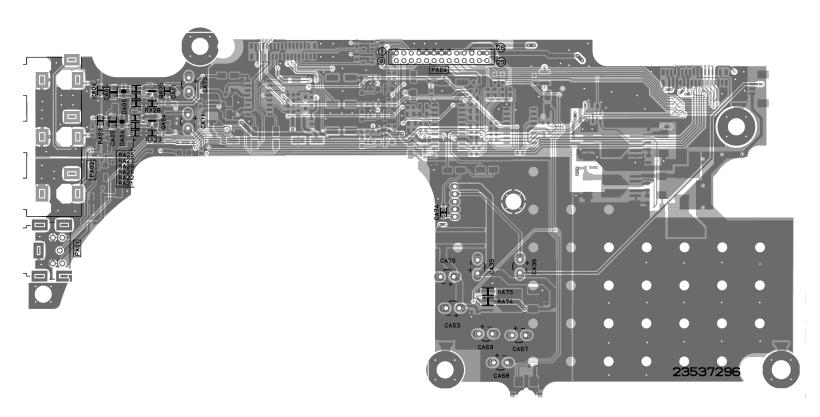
U0022 Input PC Board (Bottom Side)
